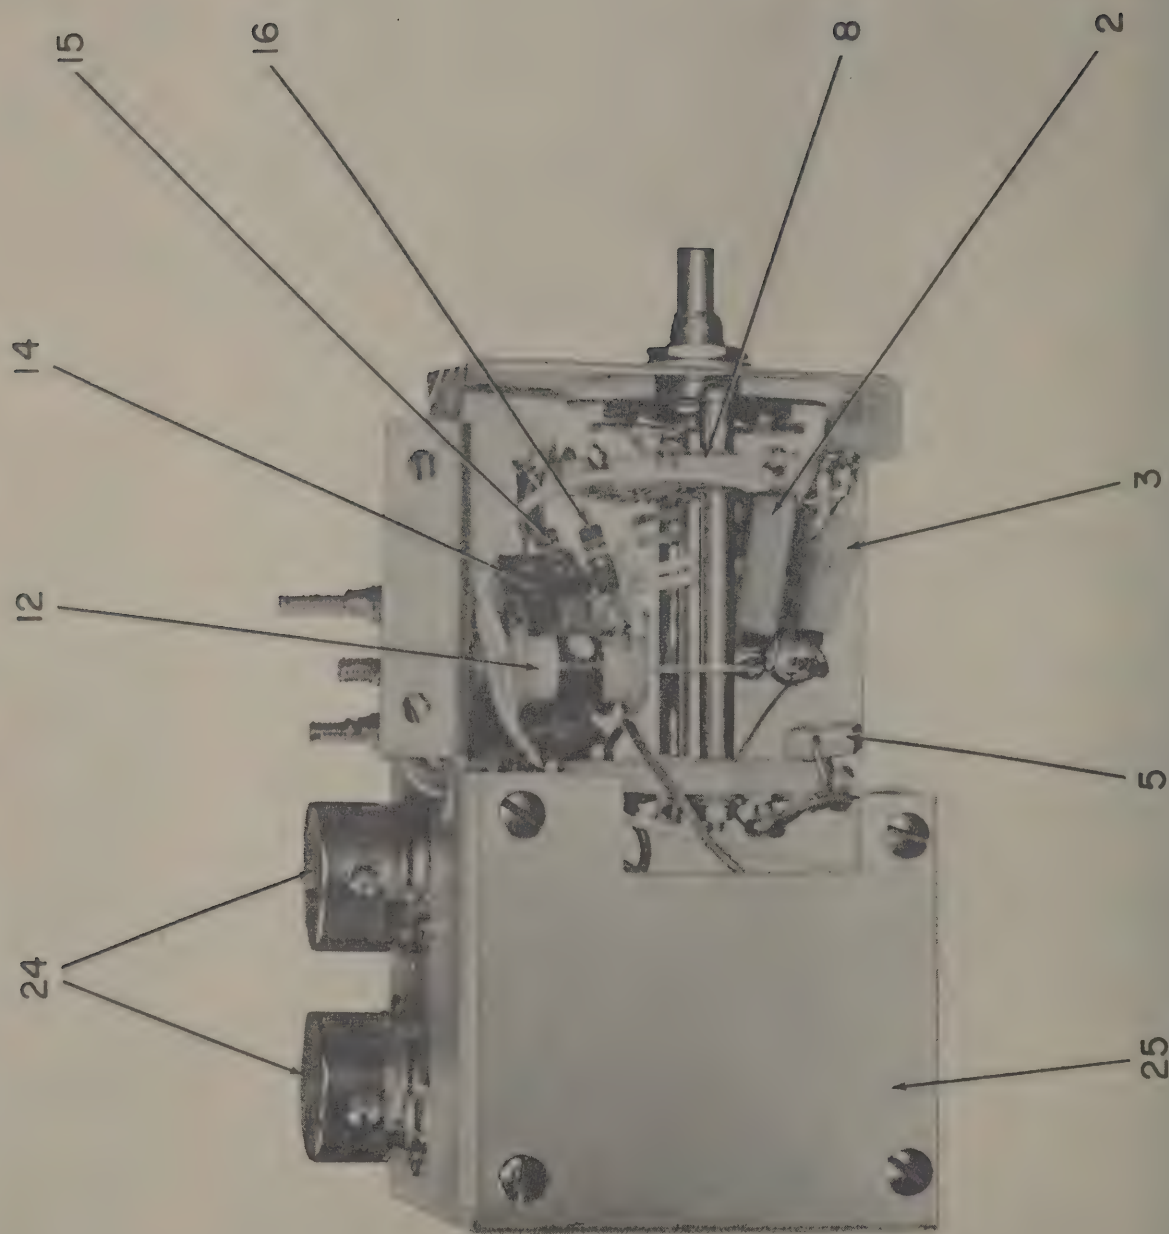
Marker Generator Chassis Assembly-Left Side View (Sheet 1 of 2)
